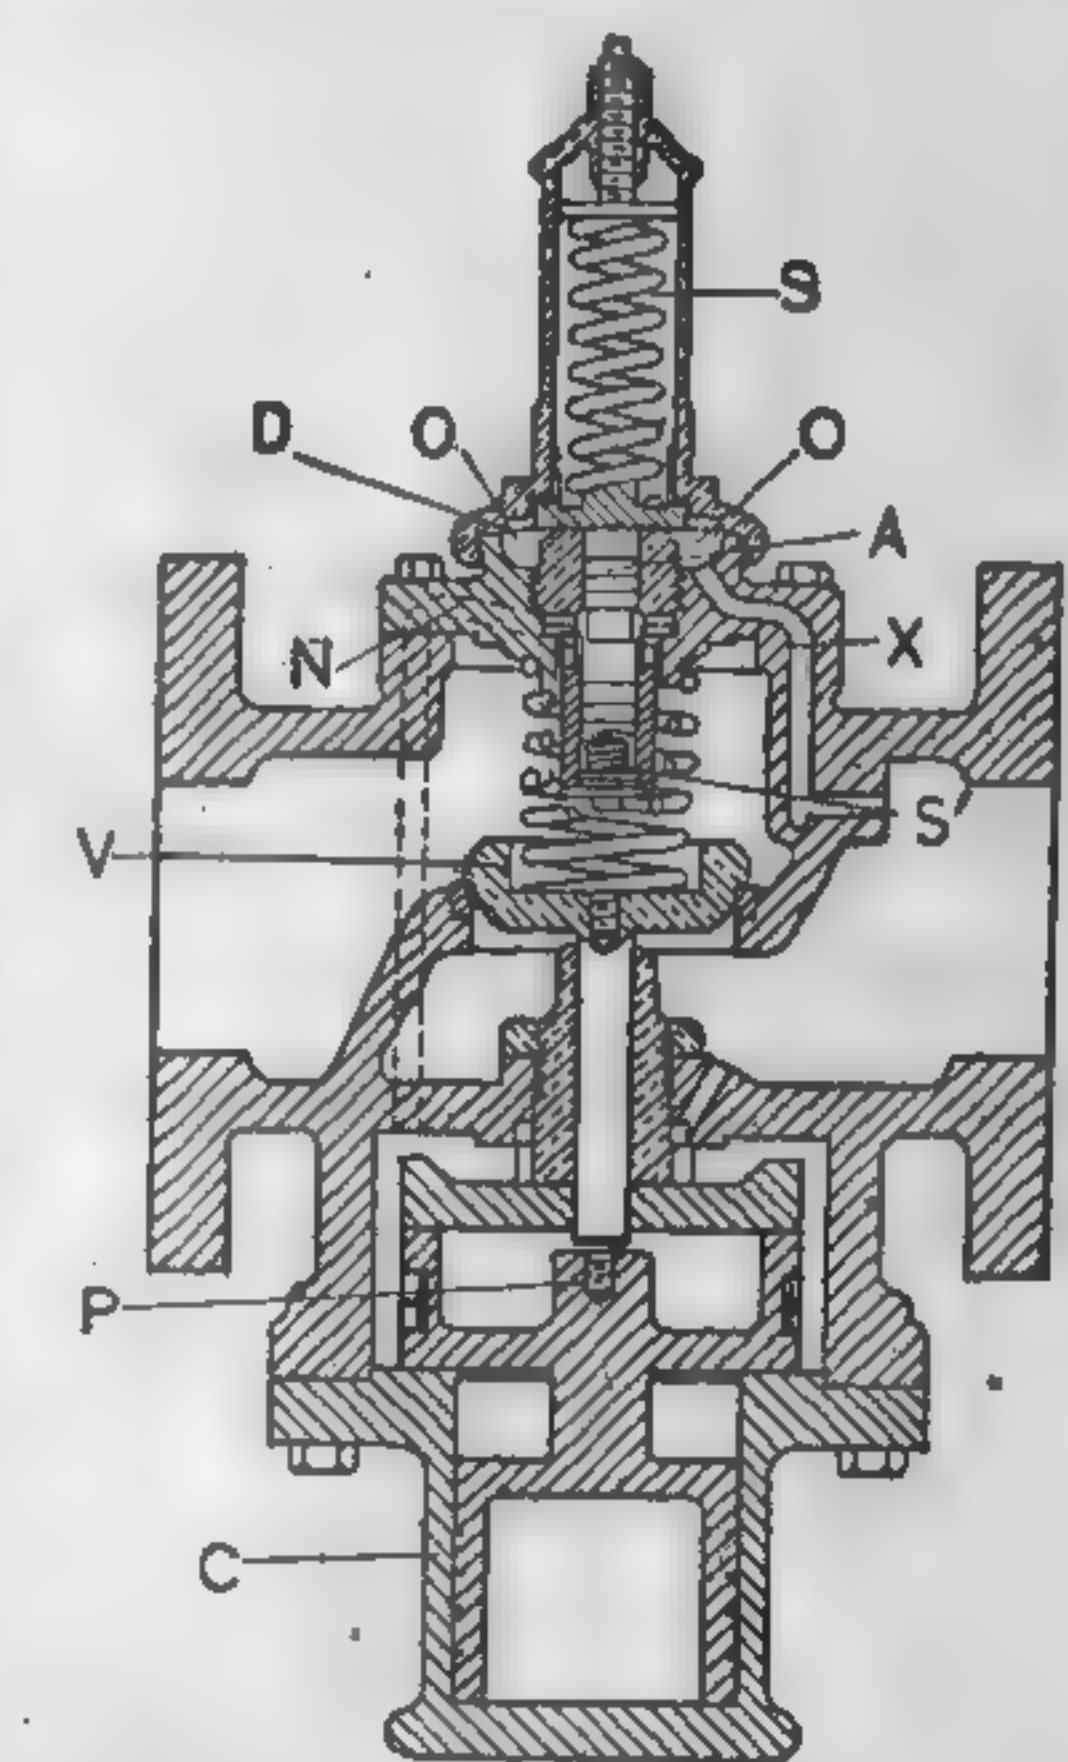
Typical Reducing Valve. (Spring-loaded Diaphragm.)
